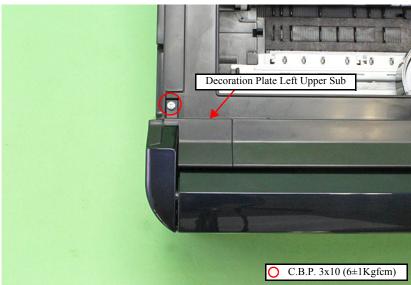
Removing the Decoration Plate Left Upper Sub (1)
